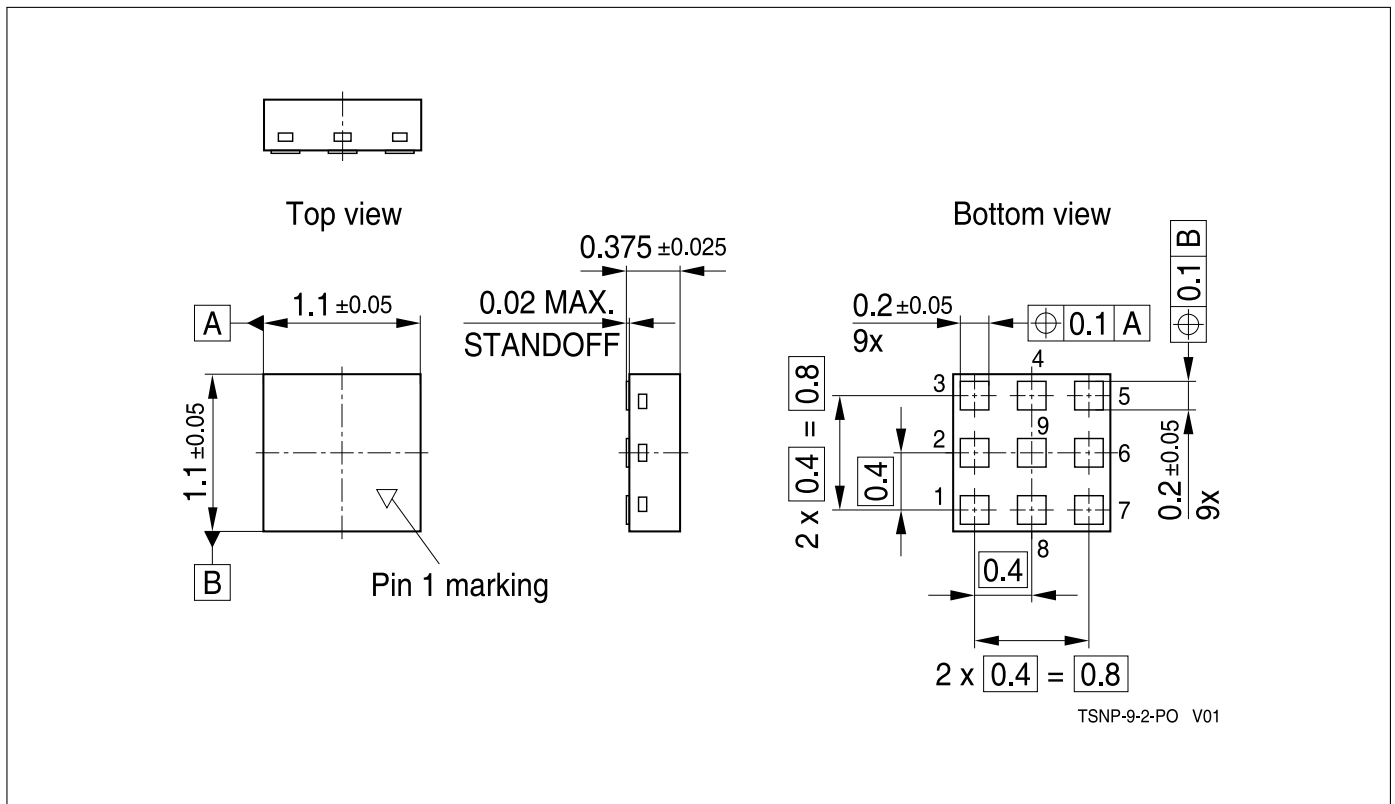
TSNP-9-2 Package Outline (top, side and bottom views)
